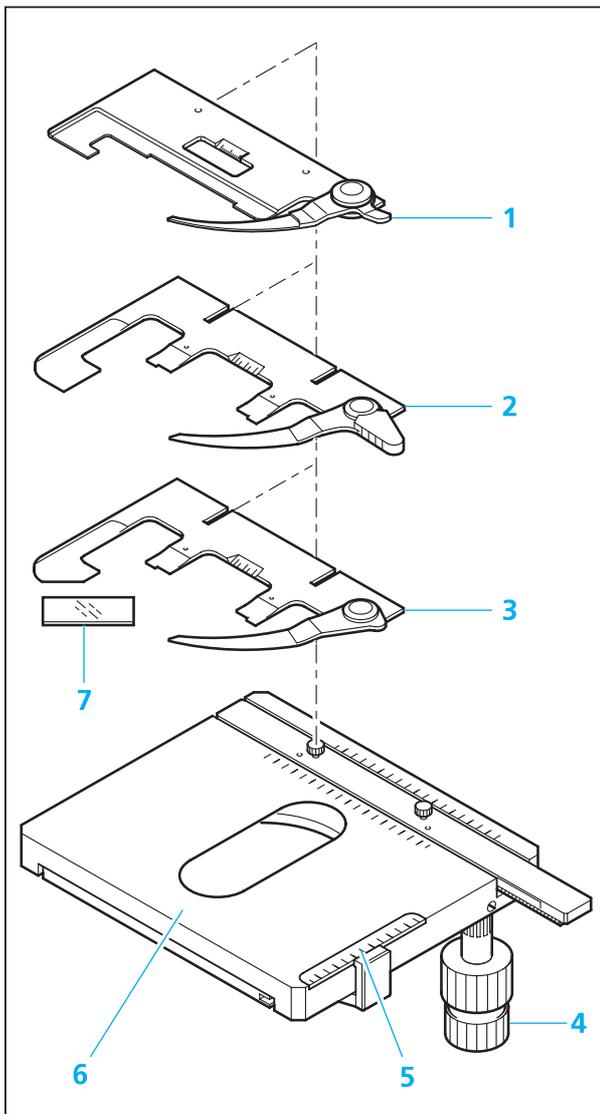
Attachment of specimen holder to mechanical stage 75x30 R
